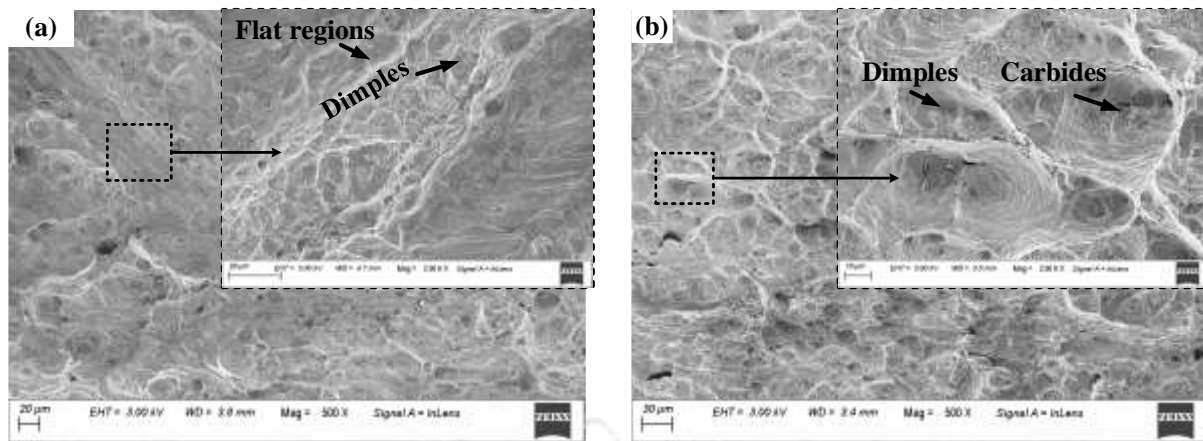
SEM micrograph of the fractured tensile surfaces of welds obtained at 140 mm/min traverse speed in (a) Conventional FSW and (b) I-FSW
